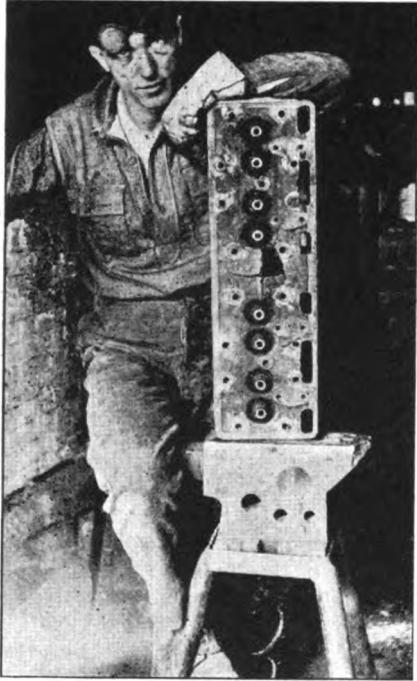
BROKEN PARTS WERE REMOVED AND BEVELED BEFORE PREHEATING
